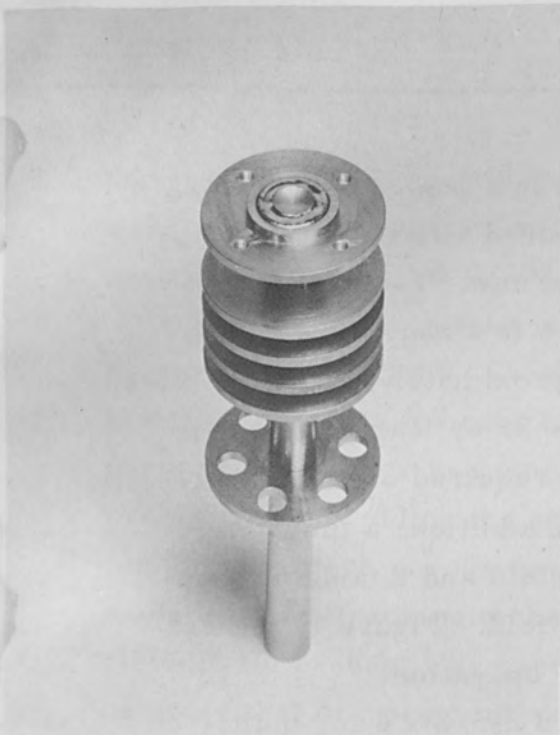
Porous tungsten button welded to molybdenum support
